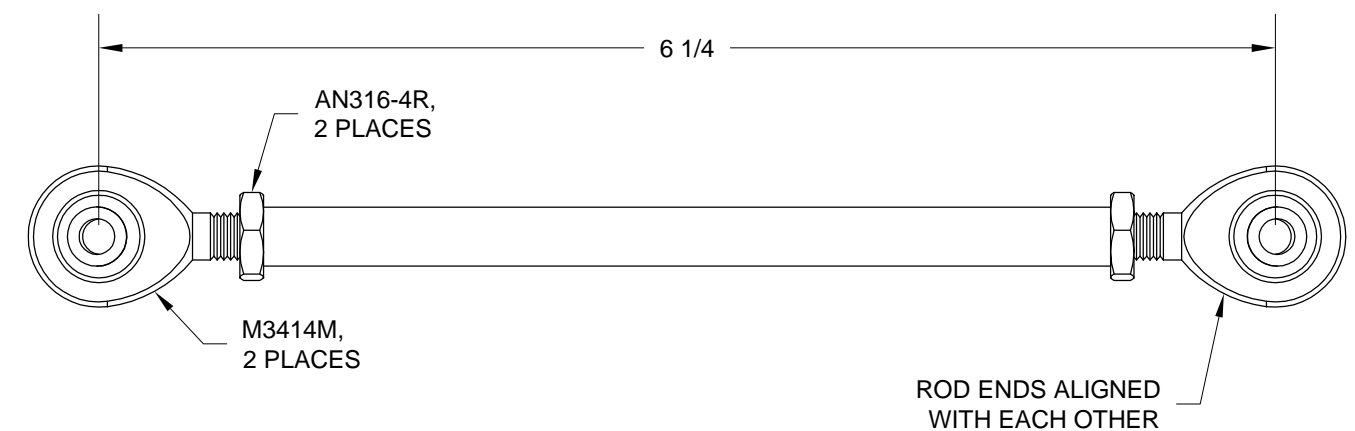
PITCH SERVO PUSHROD ASSEMBLY
